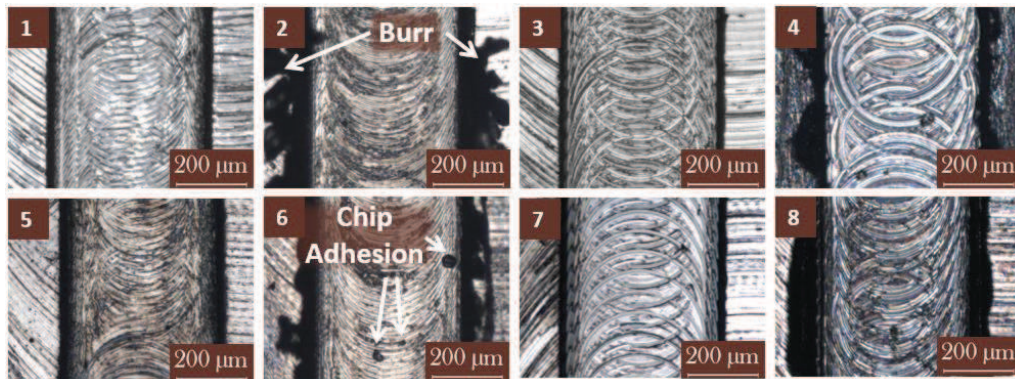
Surface morphology and burrs in dry cutting; cutting conditions 1-8 (6th groove shown).
